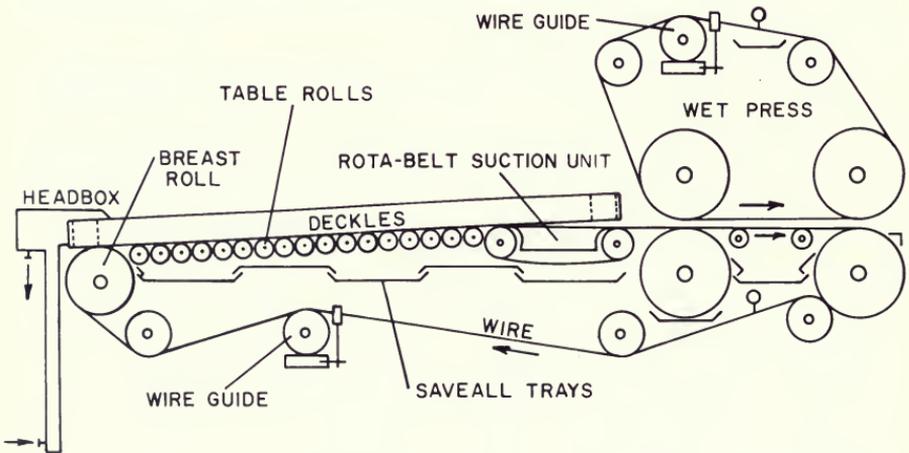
Fourdrinier board forming machine with wet press. (Drawing after Lyall 1969.)
